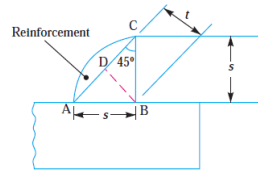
Enlarged view of a fillet weld.
